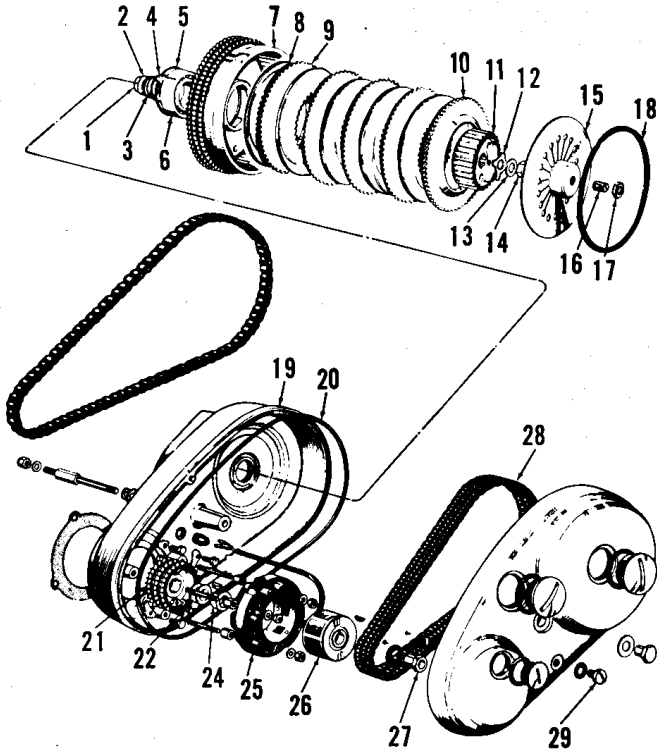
Exploded view of clutch and primary drive assembly used on later models. Refer also to Fig. N2-6 or N2-7 for view of early model clutch. Install shims (3 & 4) as required for primary chain alignment.
